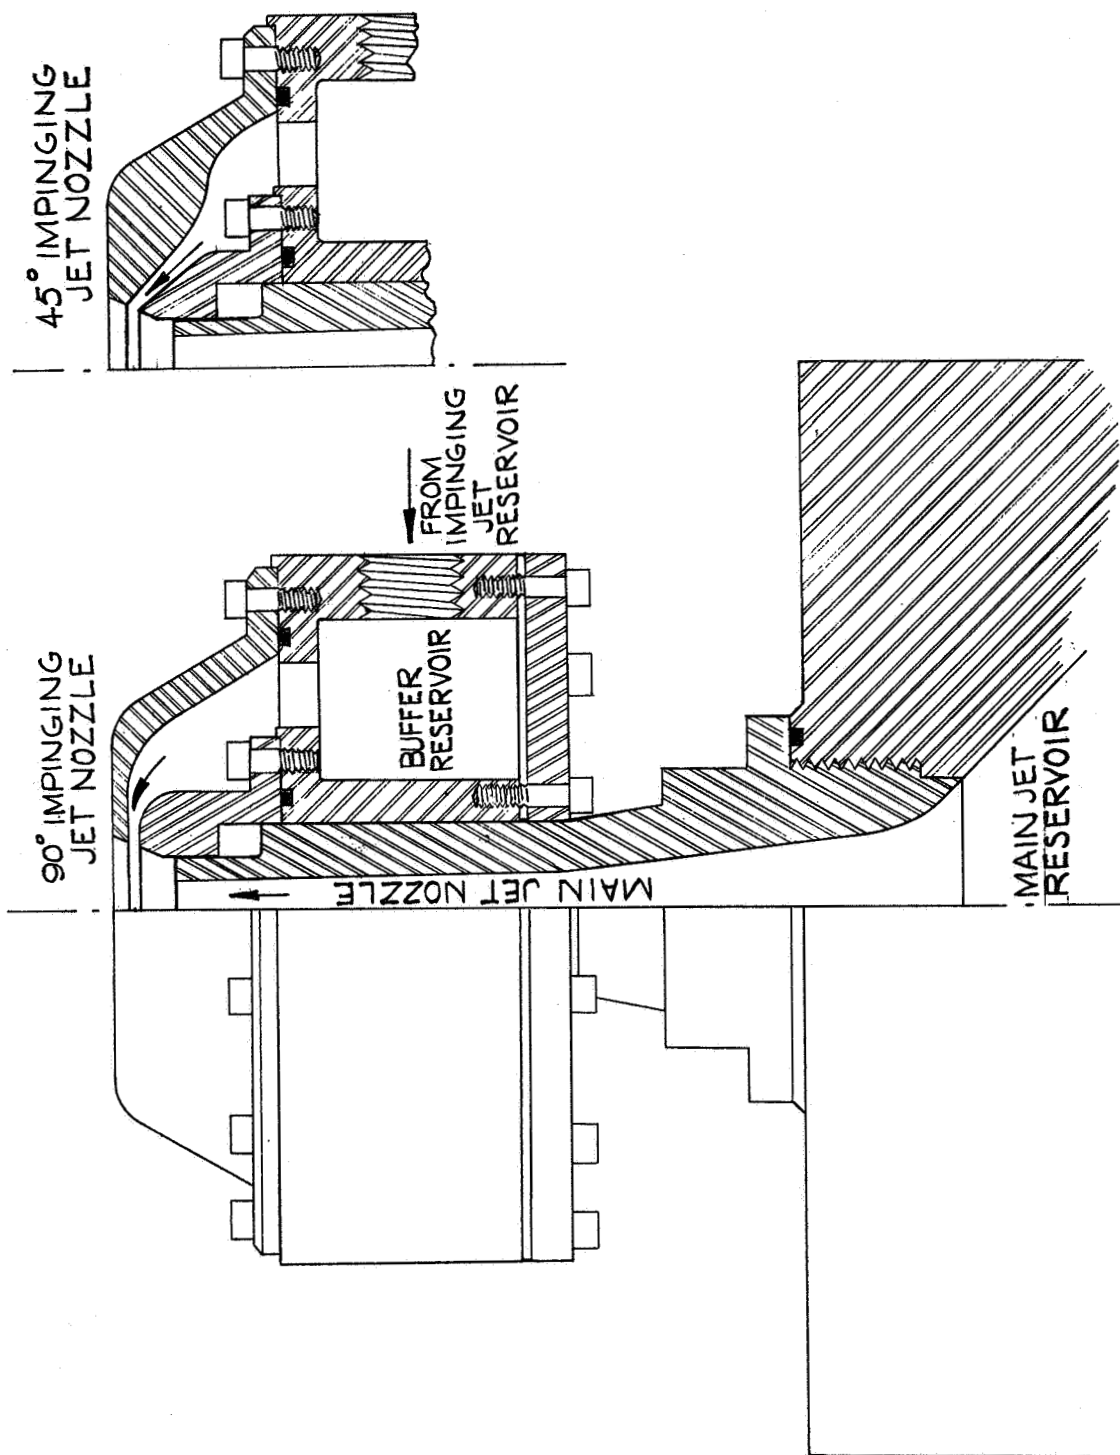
NOZZLE ARRANGEMENT I. BOTH 90° AND 45° IMPINGEMENT USED WITH NO ENTRAINMENT PROVISION MADE UPSTREAM OF THE IMPINGEMENT LOCATION. MAIN JET EXIT DIAMETER = 3/8 IN. IMPINGING JET ANNULUS EXIT: 3/4 IN. DIAM. X 3/64 IN. WIDE.
